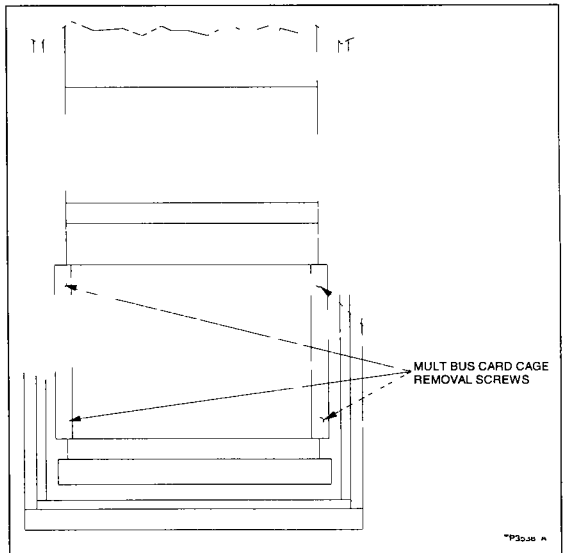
8. Multibus Card Cage Removal for IIOIS40A Cabinet
